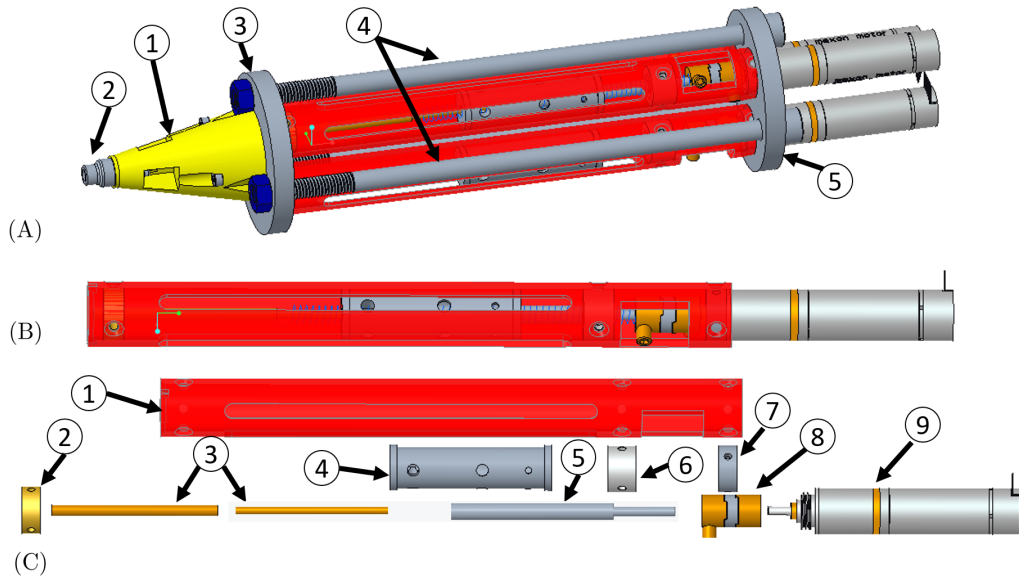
Distal Microsnake CAD Model: (A) Distal microsnake actuation unit: ① Actuation Cone ② Snake holder ③ Front Plate ④ M5 screws ⑤ Rear Plate. (B) Single backbone actuation module. (C) Exploded view of a single backbone actuation module: ① Aluminum cylinder ② Bottom holder collar ③ Telescopic anti-buckling tubes ④ Anti-backlash Piston ⑤ Lead screw ⑥ Bearings holder collar ⑦ Top holder collar ⑧ Oldham coupling ⑨ Maxon motor combination
